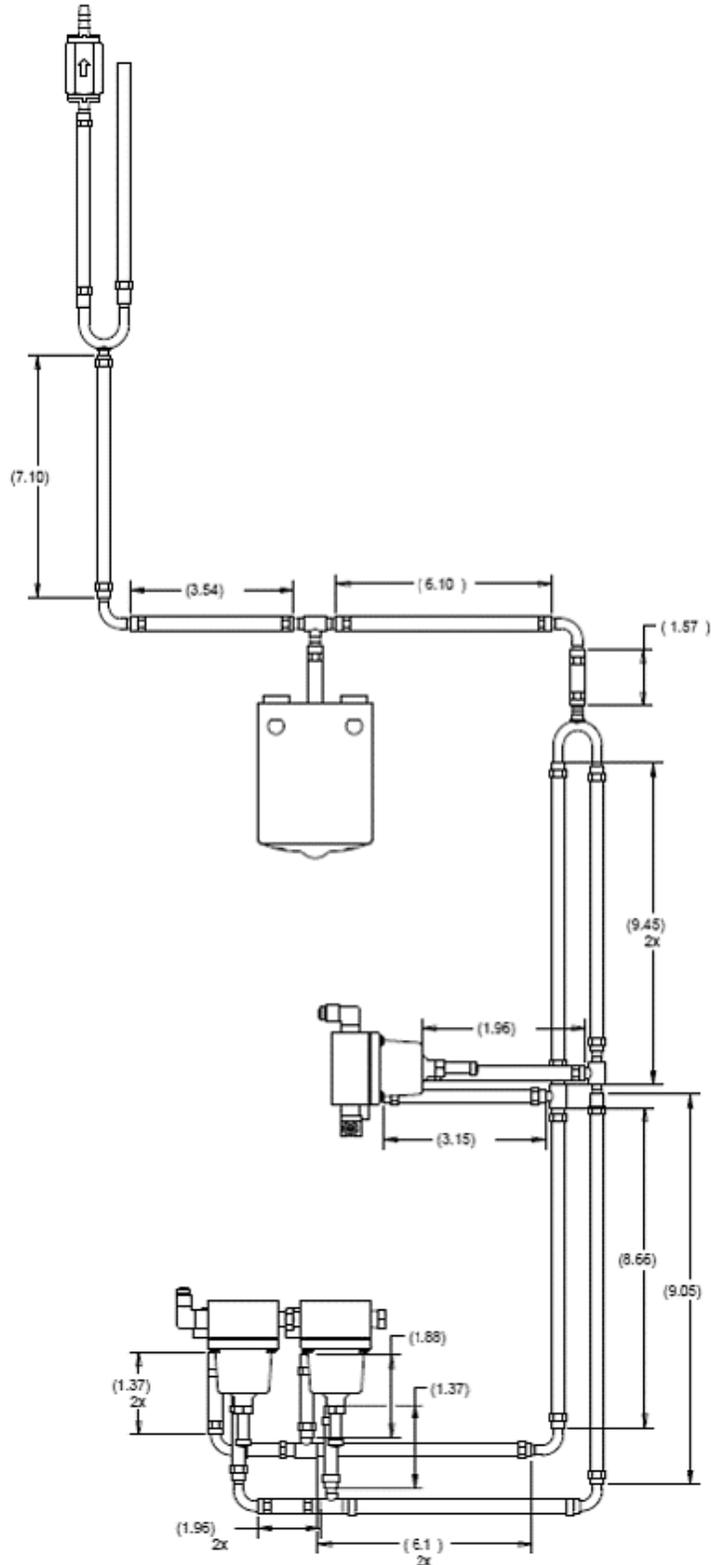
Approximate Cut Lengths for Tubes, Viper 2 Barrel
